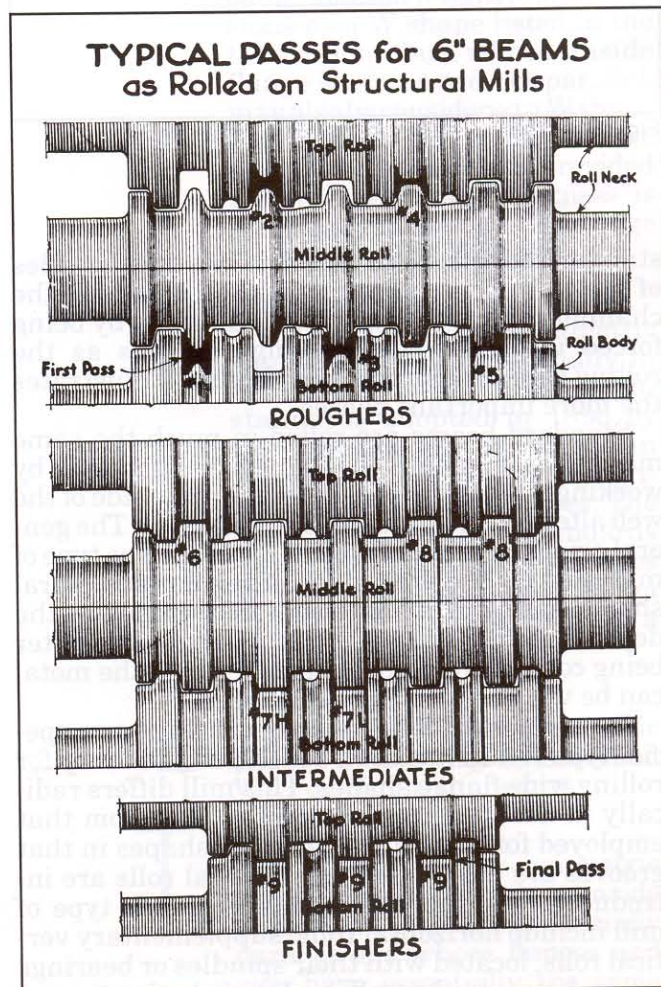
Typical arrangement of rolls and passes in rolling standard beams.
